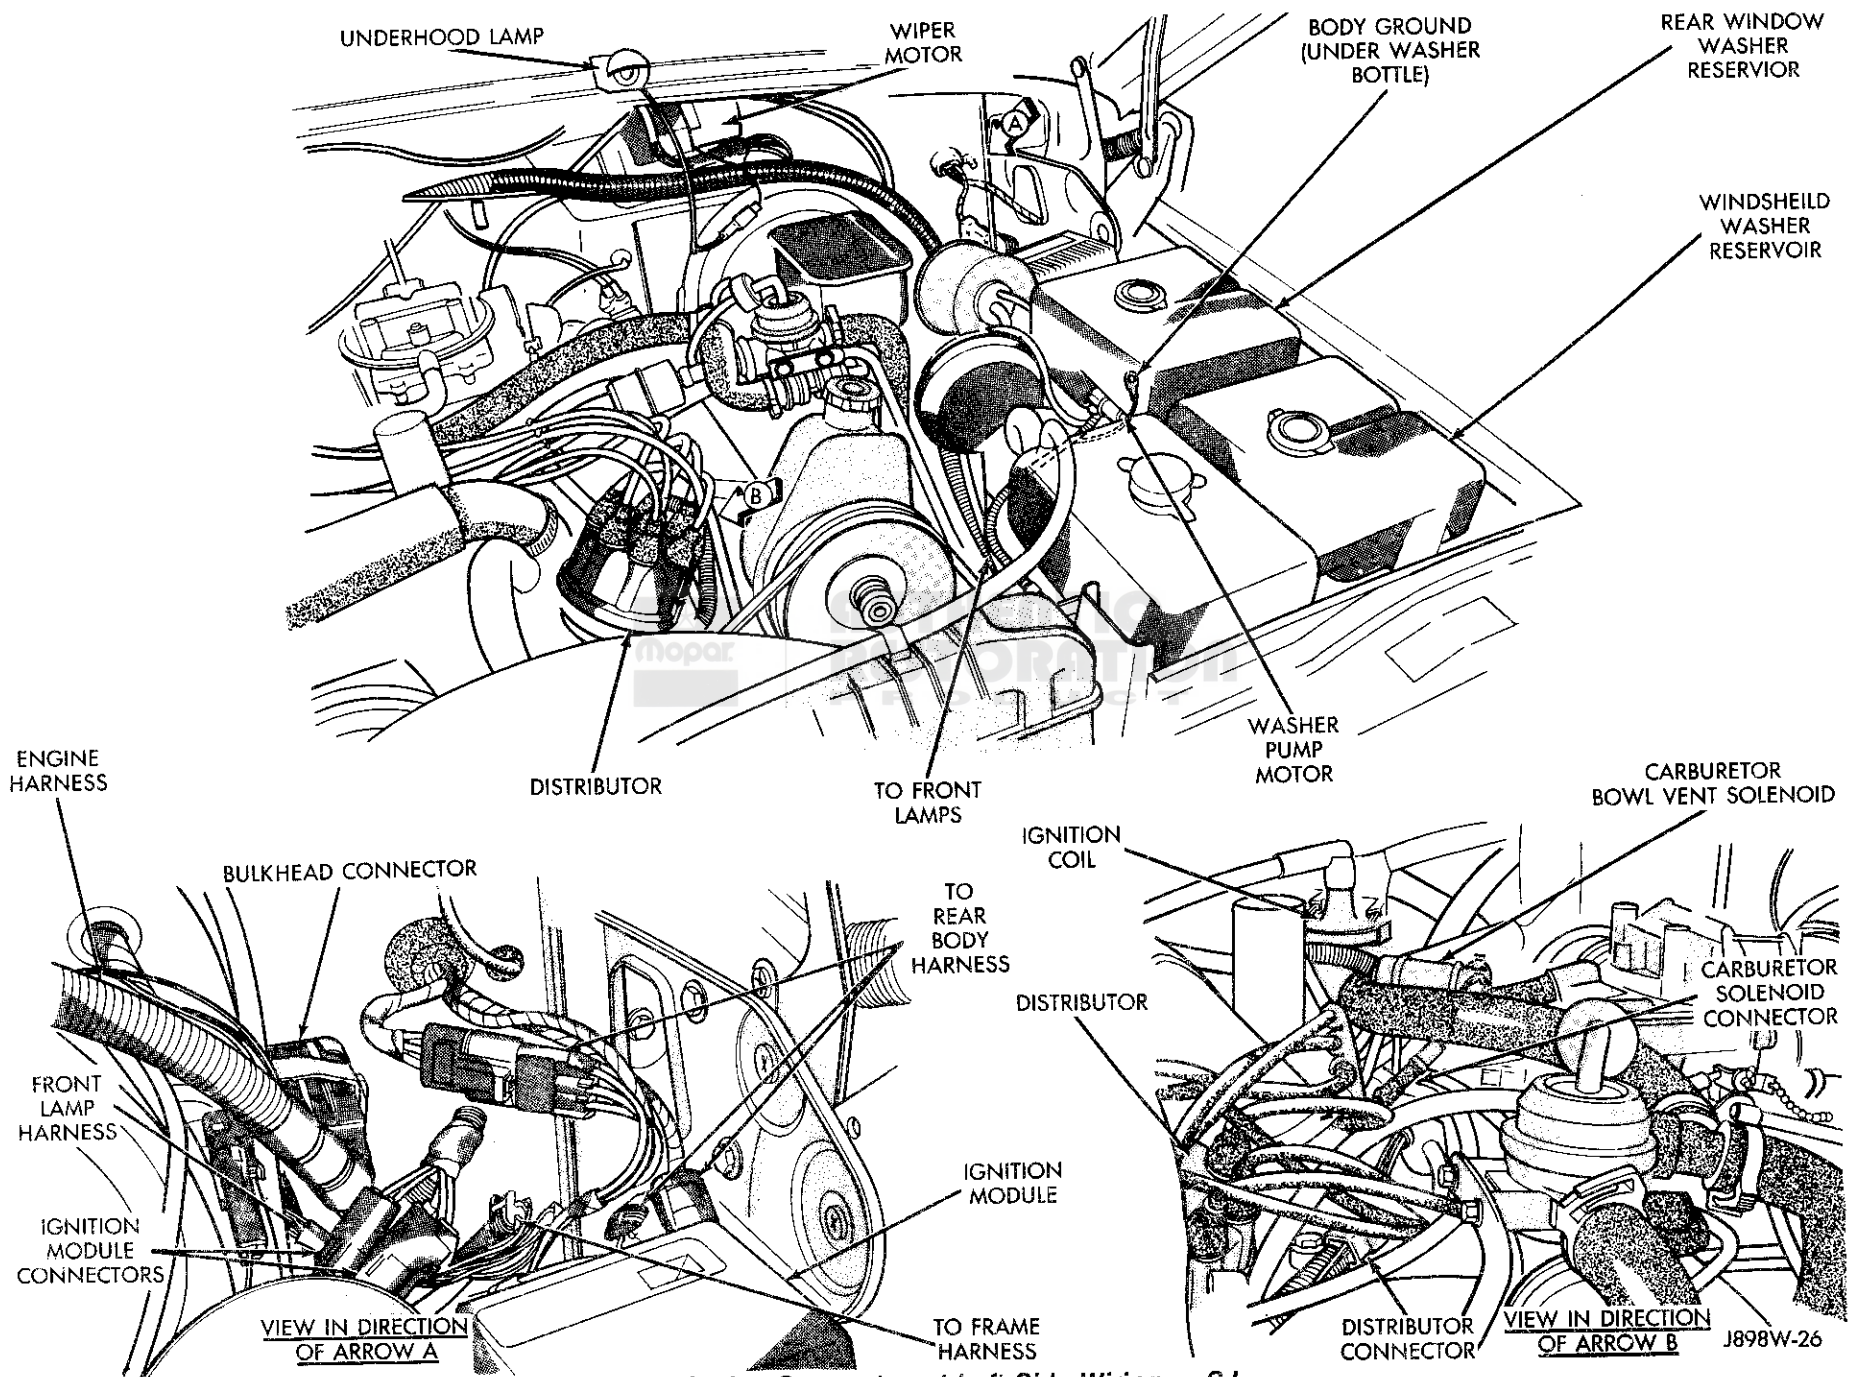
Engine Compartment Left Side Wiring — SJ
